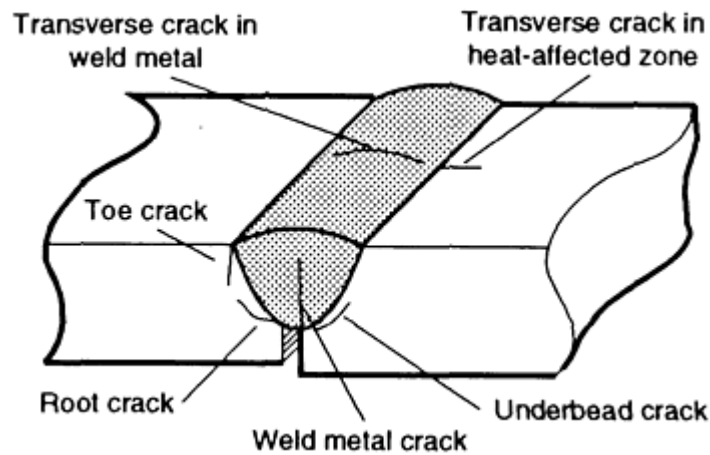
SCHEMATIC SHOWING LOCATION OF HYDROGEN-INDUCED CRACKS IN CARBON STEEL WELDMENTS.
